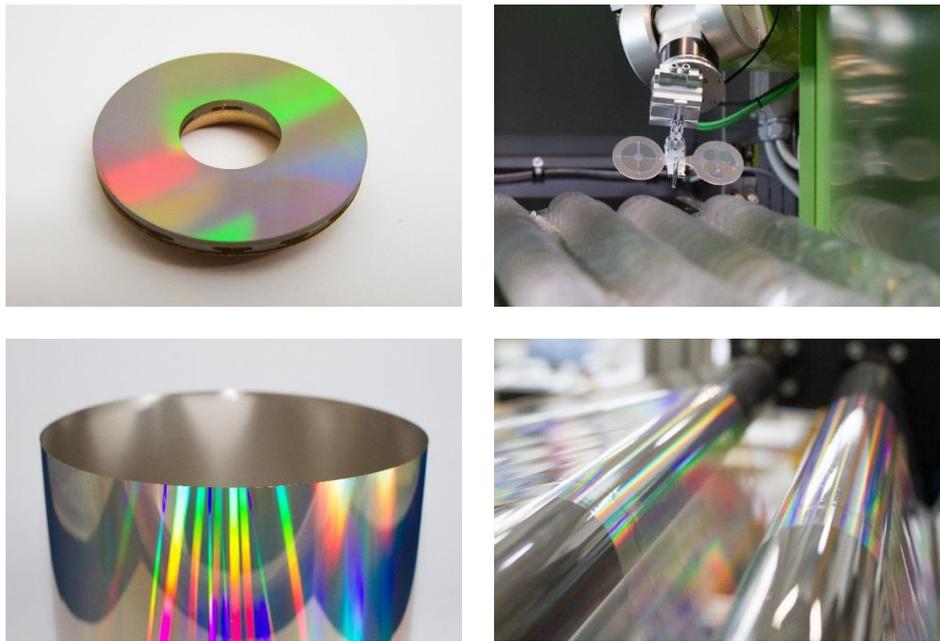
Industrial replication of micro and nanostructured films and components, (a) mold insert, (b) injection molding, (c) seamless sleeve, (d) roll-to-roll imprinting
